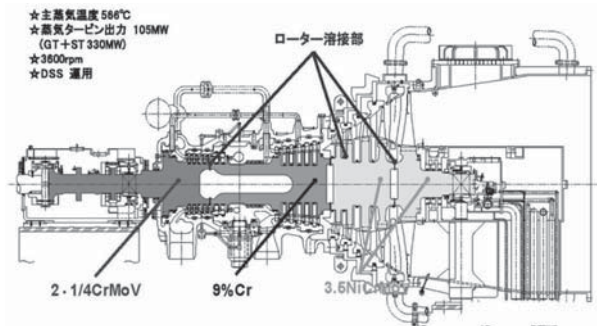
Weld Rotor⁽⁹⁾
